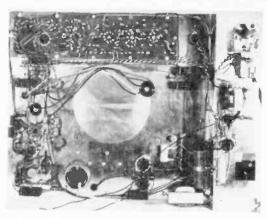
Rear view of chassis shows printed circuit board that saves lots of hard labor. Hole is for tube,
